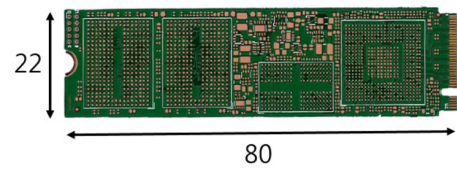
Dimensions of PCB specimen (Unit: mm)
